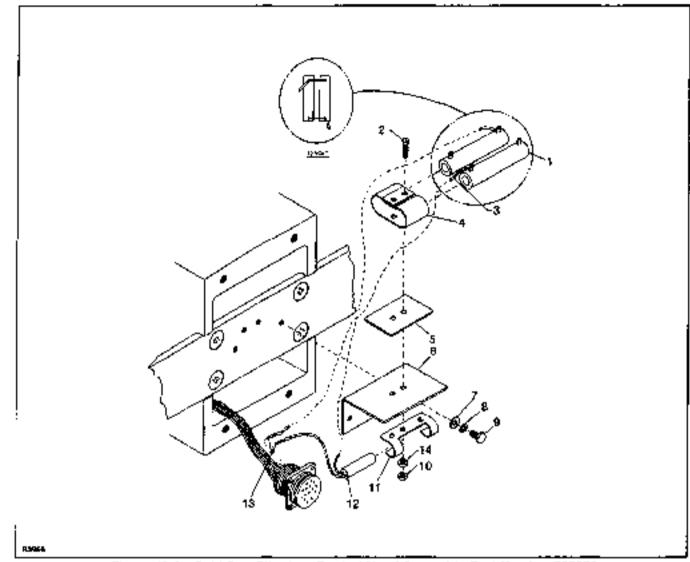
Cold Conditioning, Control Head Assembly Part Number 505050
